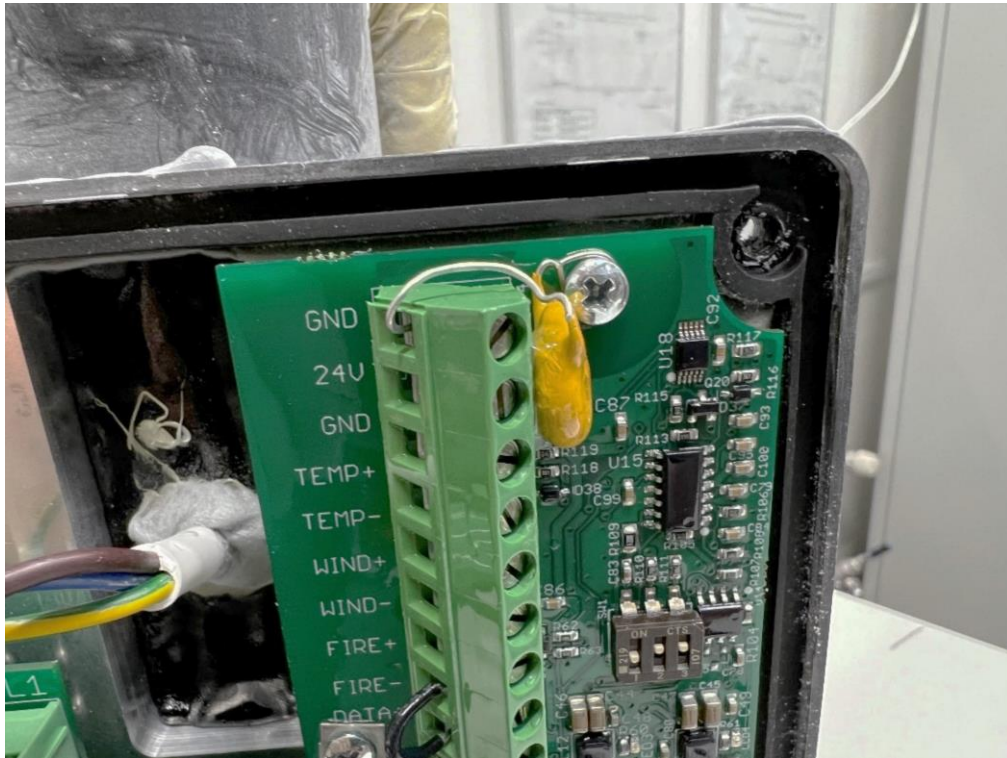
Visual inspection. No ingress of dust observed inside the enclosure of the test object.
